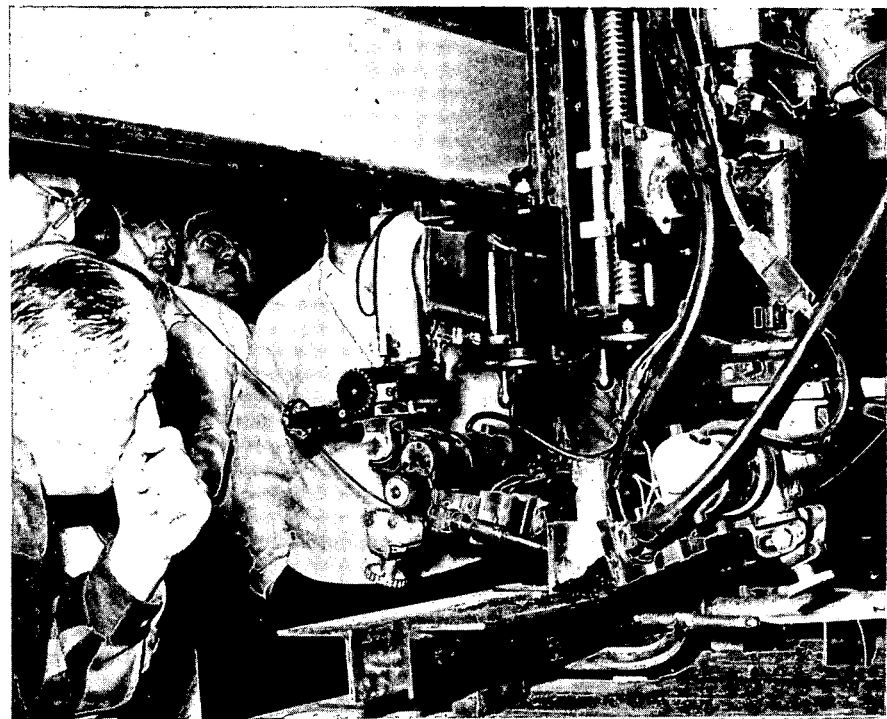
AUTOMATIC GIRTH WELDING INSTRUCTION
